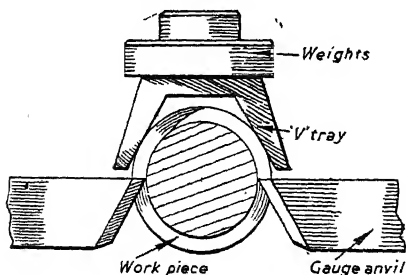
Comparative check of sensitiveness of thread caliper gauges.
